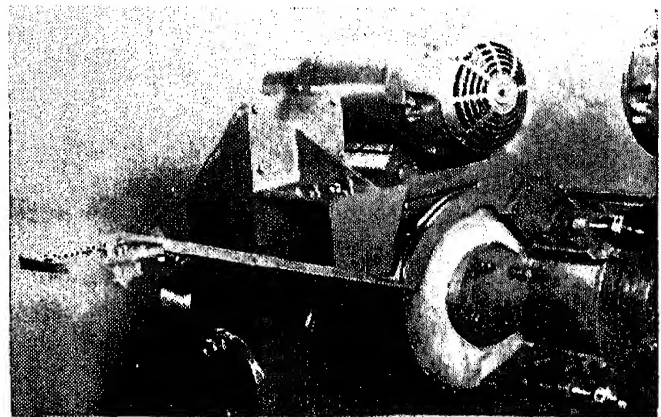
A 15 in. double horizontal spindle disk grinder equipped with a notched rotary carrier and inclined chute to grind small sizes of ball bearing inner races at the rate of 60 to 80 per minute. (Courtesy Gardner Machine Co.)
